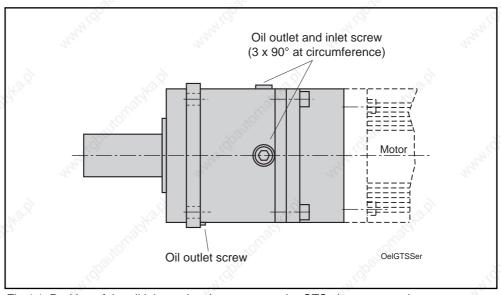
Position of the oil inlet and outlet screws on the GTS planetary gearbox
